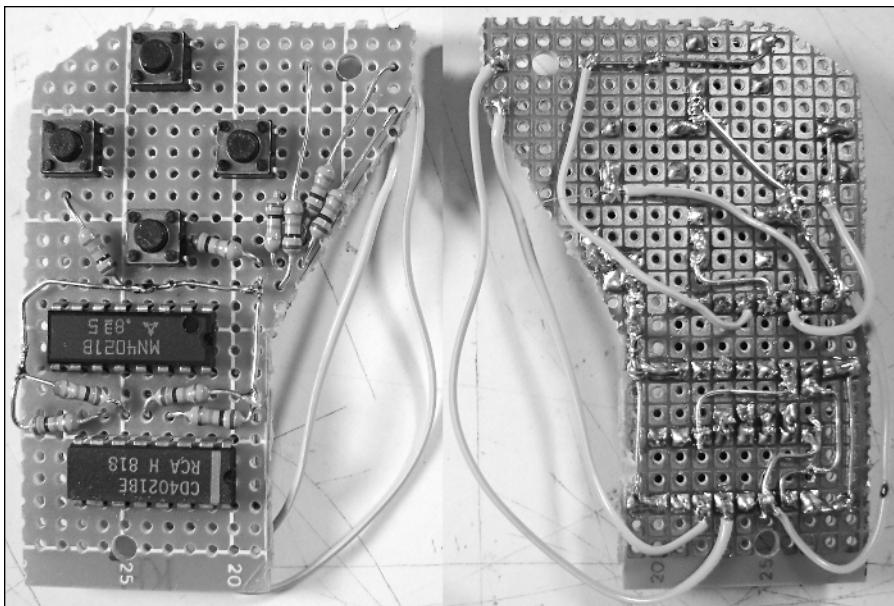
The front (left) and back (right) of the completed left PC board.
